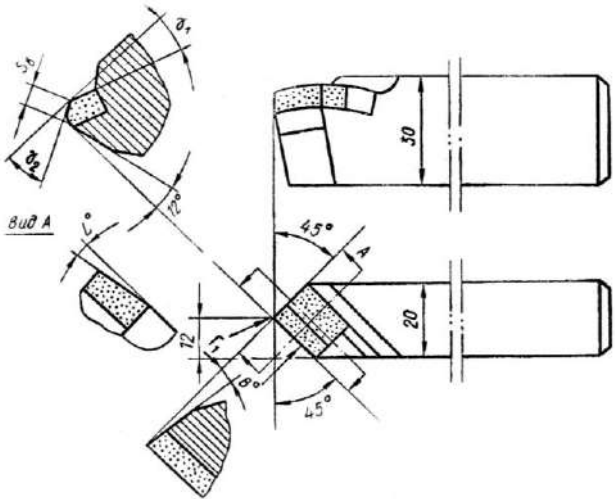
Geometry of cutting part of cutter while turning of deposited metals
